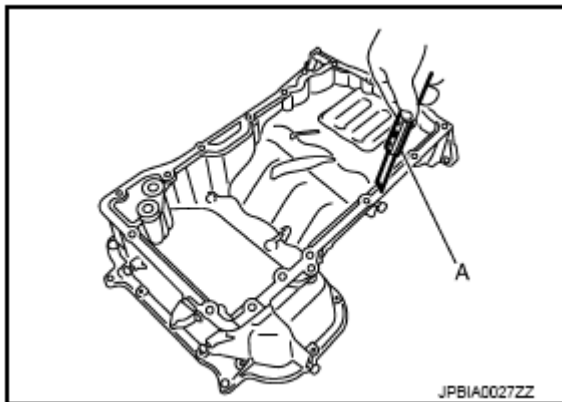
Removing Old Liquid Gasket From Lower Cylinder Block Using Scraper
